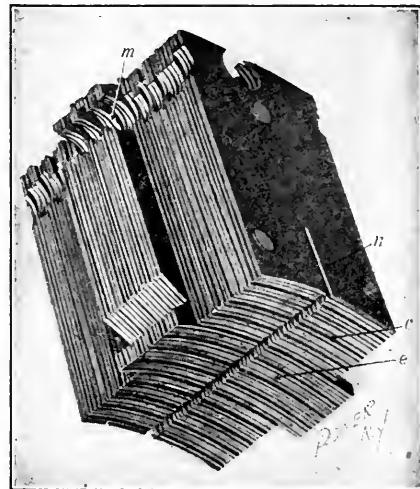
LAMINATED POLE PIECE BEFORE BEING CAST-WELDED INTO THE FRAME OF THE FORT WAYNE GENERATOR, FIG. 296
